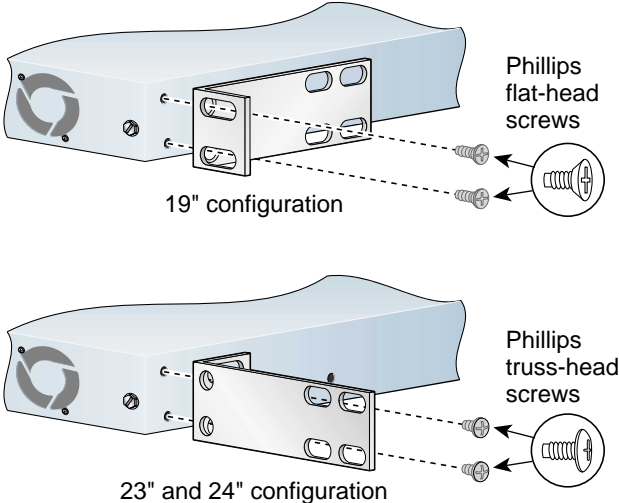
Attaching Brackets on Catalyst 2912MF XL and 2924M XL Modular Switches (Rear-Panel Forward)
